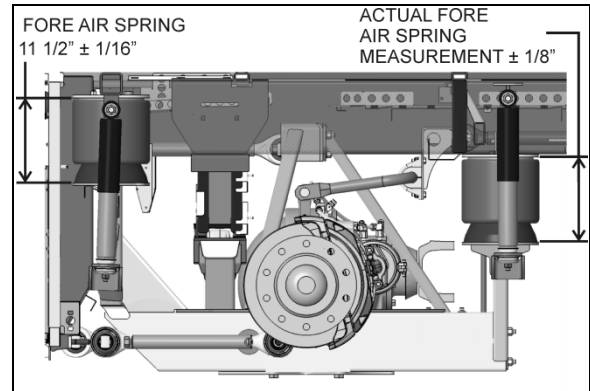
DRIVE AXLE AIR SPRING CLEARANCE 16195
